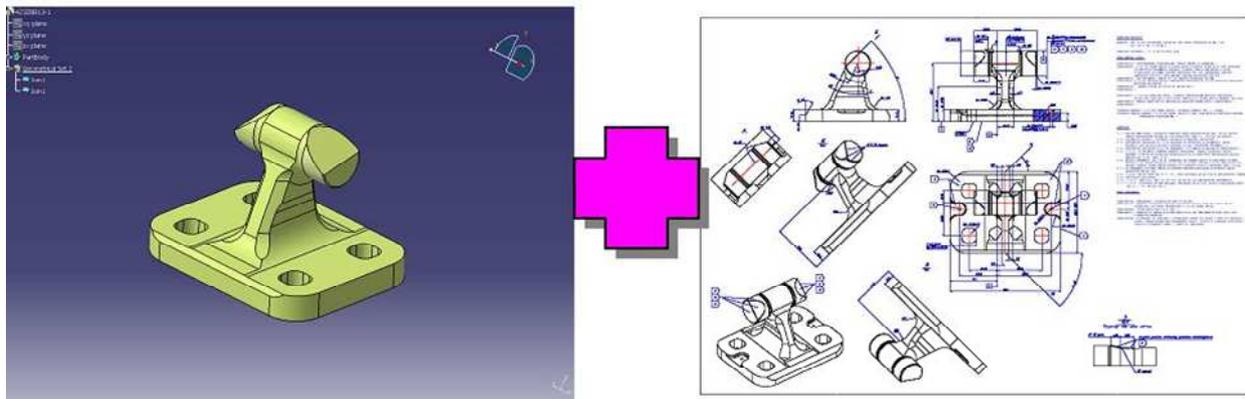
Example of a Digital Product Definition DPD. The CAD model and fully dimensioned 2D drawing sheets
